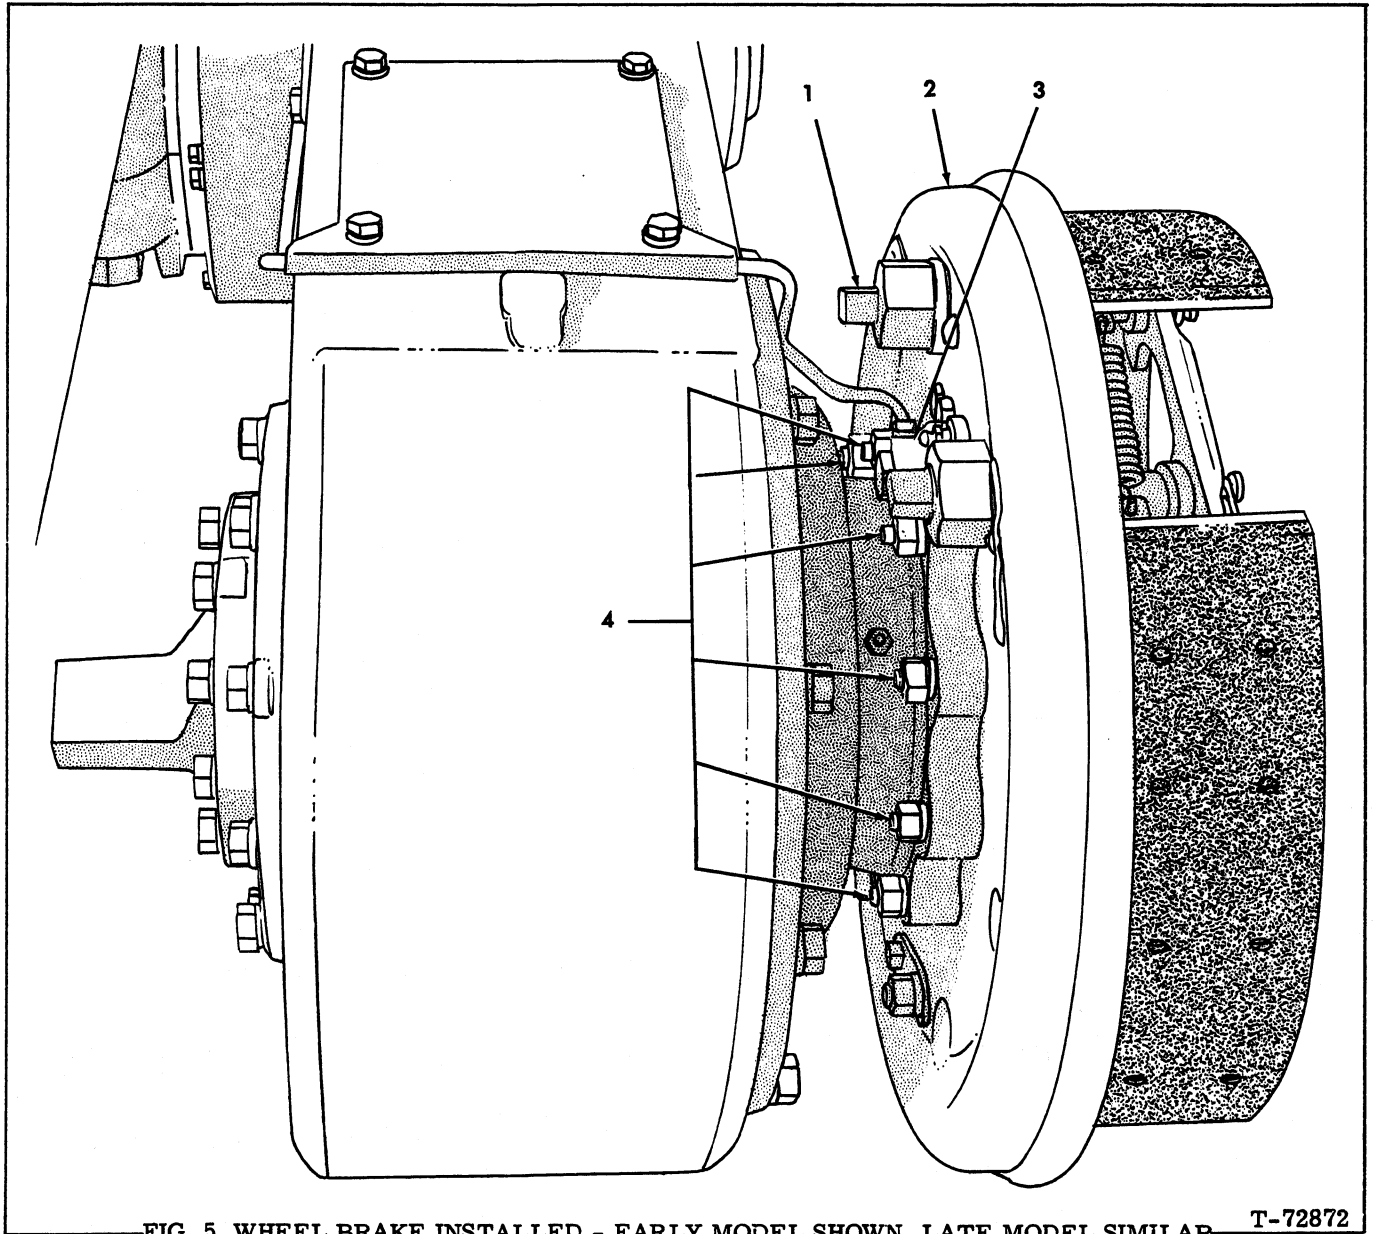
WHEEL BRAKE INSTALLED - EARLY MODEL SHOWN, LATE MODEL SIMILAR
